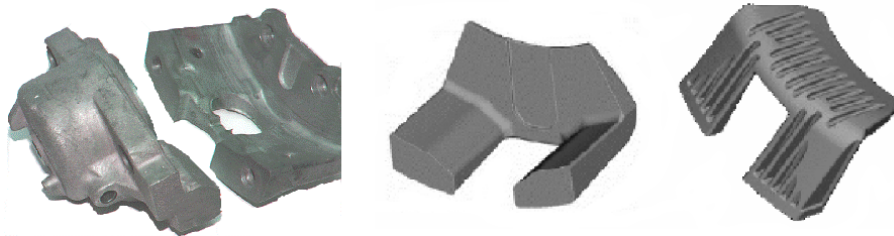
Brake calliper nose in thixoformed steel [39].
